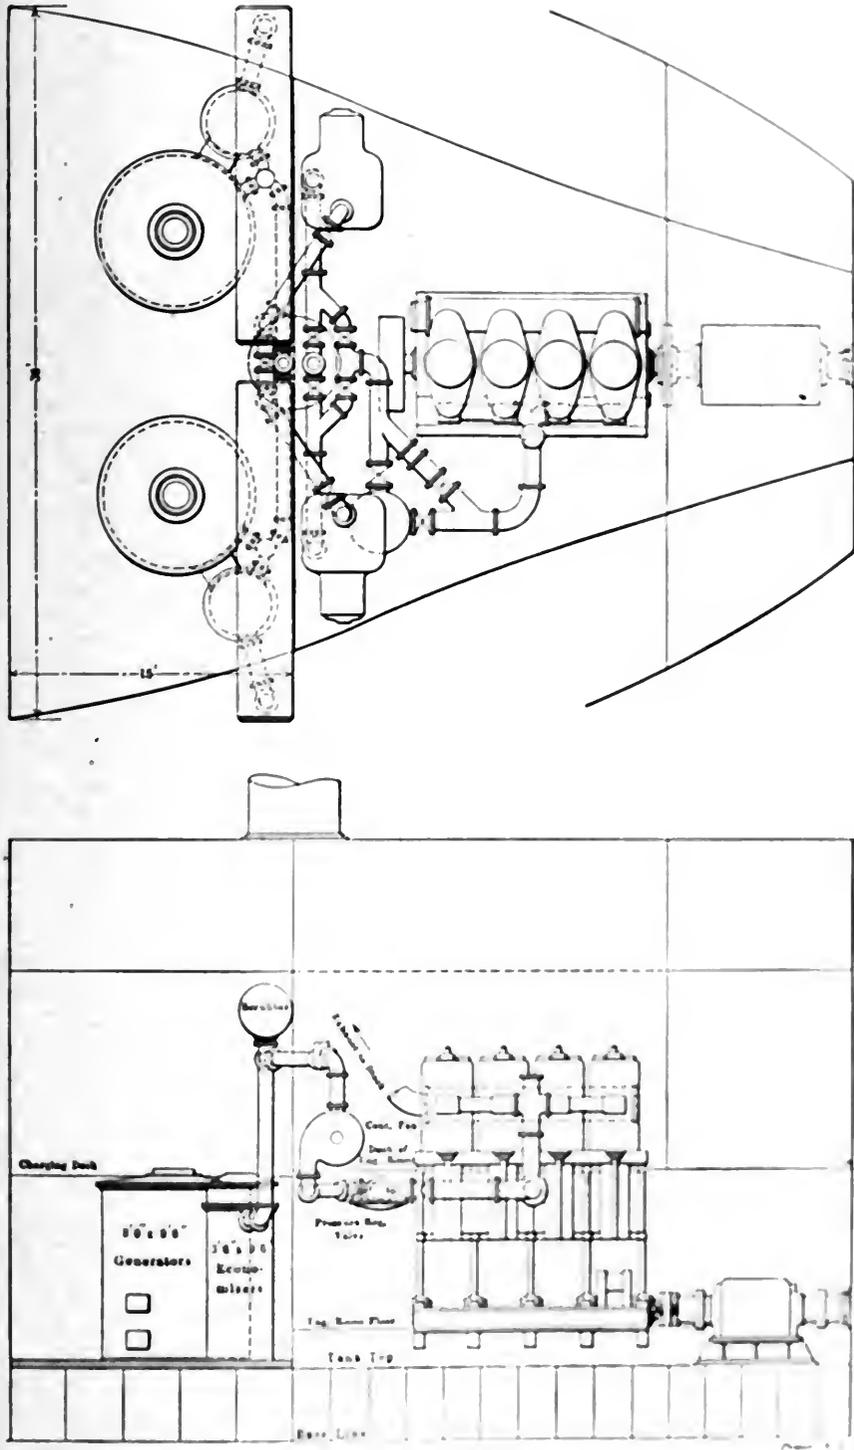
PLAN AND ELEVATION OF PROPOSED TWIN-GENERATOR MARINE PROPULSION PLANT.
